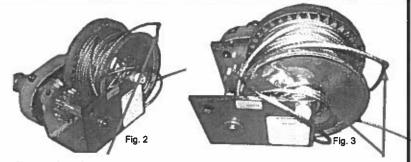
& 3: Show damaged winch cable caused from being pinched by the gears. Operator should be mindful of how much slack is on the cable and insure that the lowering cable stays on the spool at all times.
